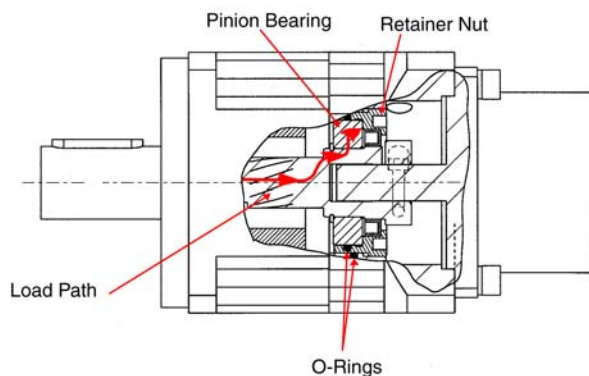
This retainer nut design prevents axial motion from being transmitted to the motor.
